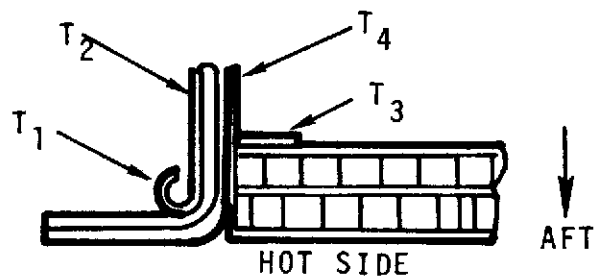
Typical Flexible Curtain Sections
